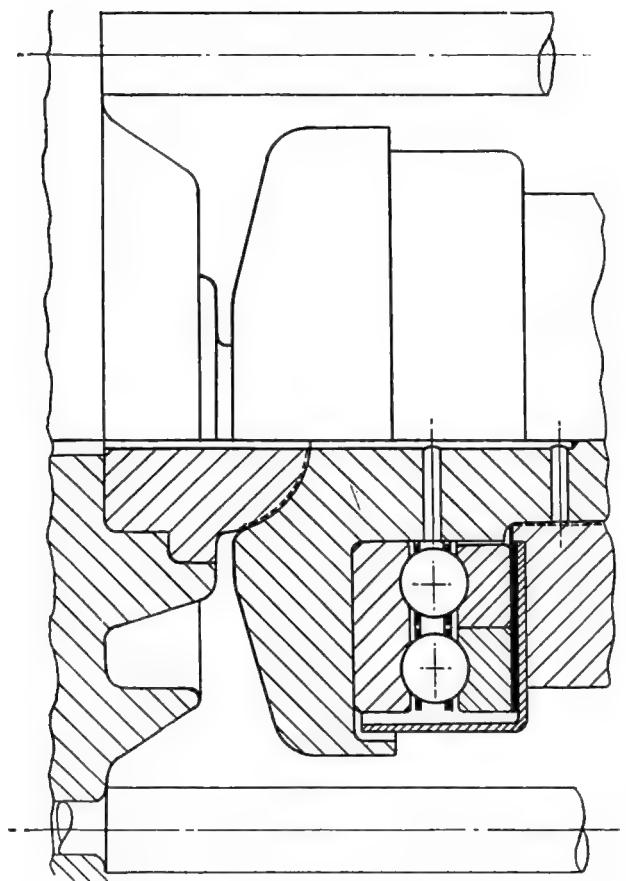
Ball Thrust Bearing to Locomotive Turntable.
